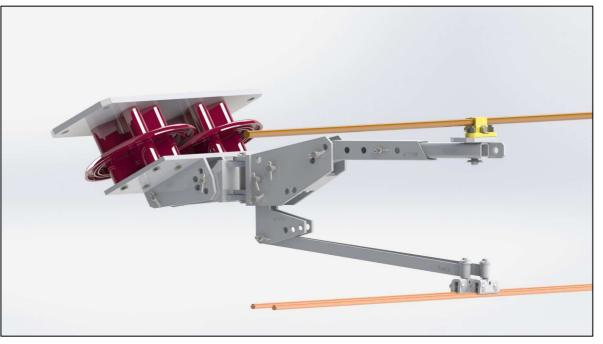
CAD View of Mark-3 Tunnel Cantilever with Heel Adjuster
